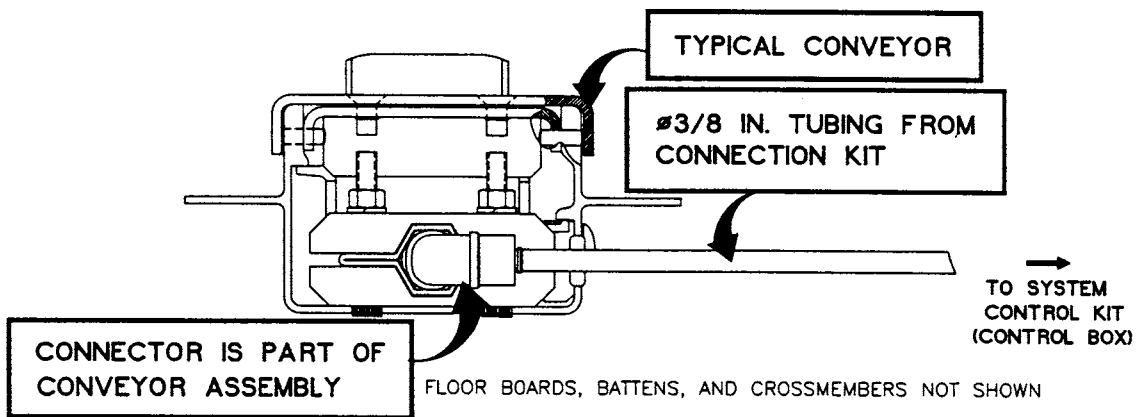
Attaching Fittings to Conveyors (Cross-section)
